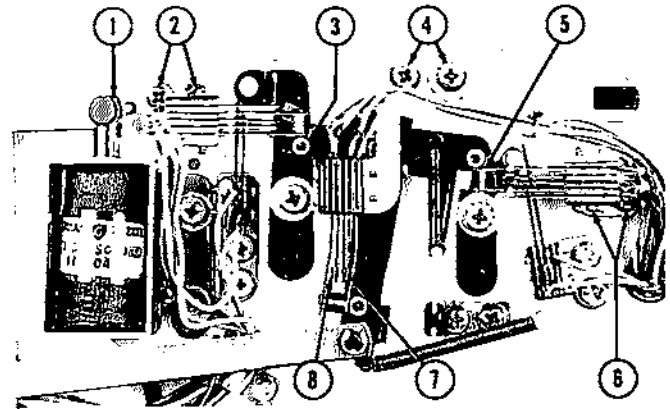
CONTROL AND LATCH SWITCH ADJUSTMENT
